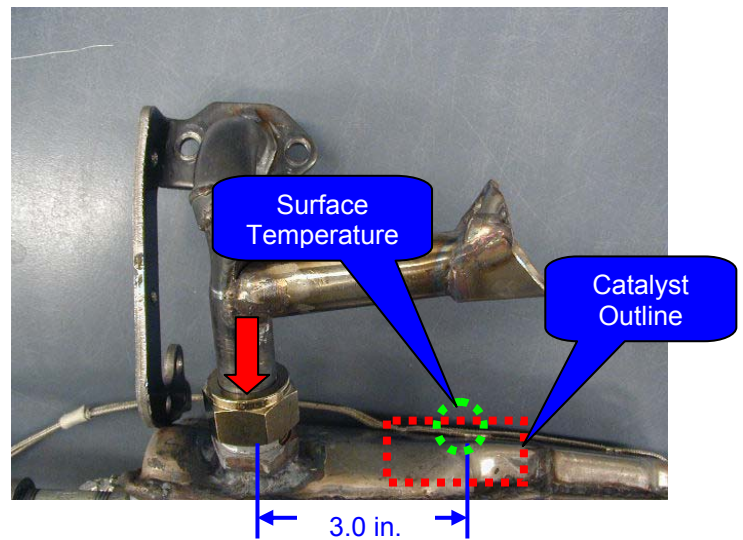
REAR-VIEW OF B+S NO. 2 EXHAUST SYSTEM
